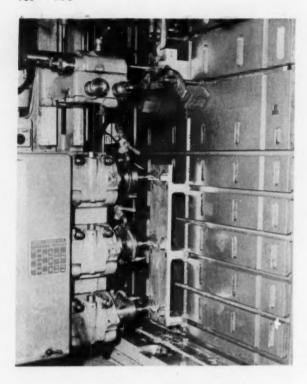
One pattern was machined from solid bar stock and test run in the foundry. This pattern (both cope and drag halves) is set up in the top fixture, and three cope and drag patterns are duplicated below.
